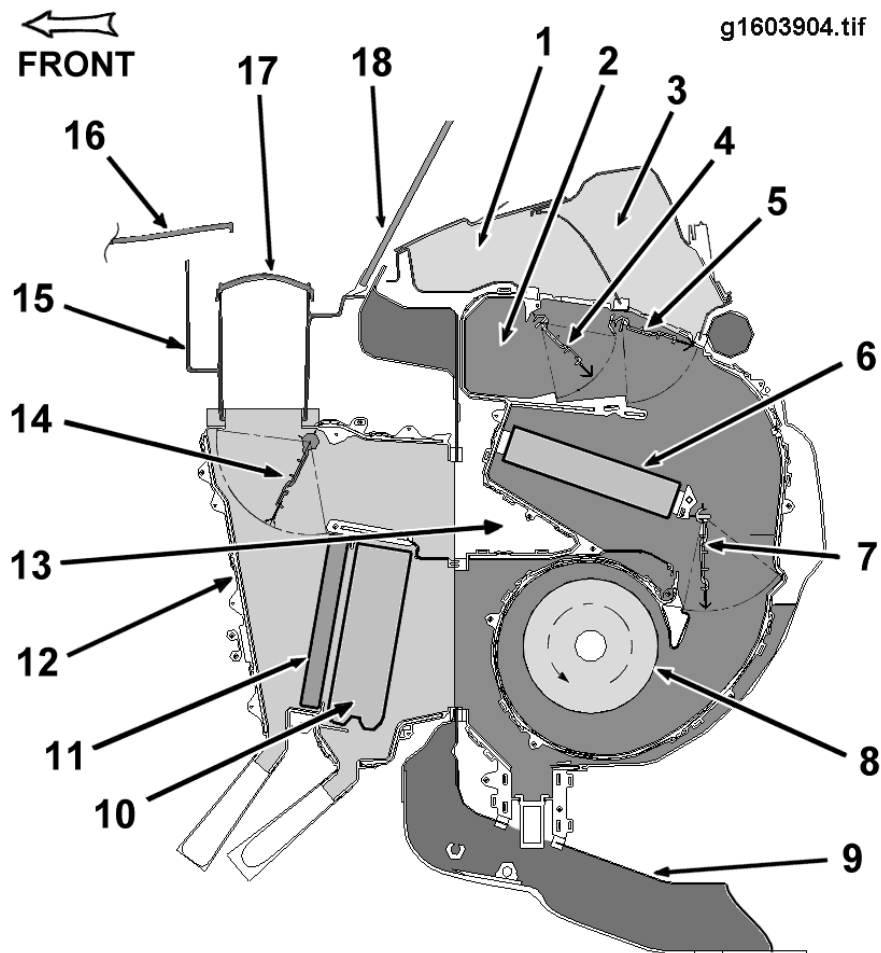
Cross-Section of HVAC Air Handling Components – Front HVAC System
